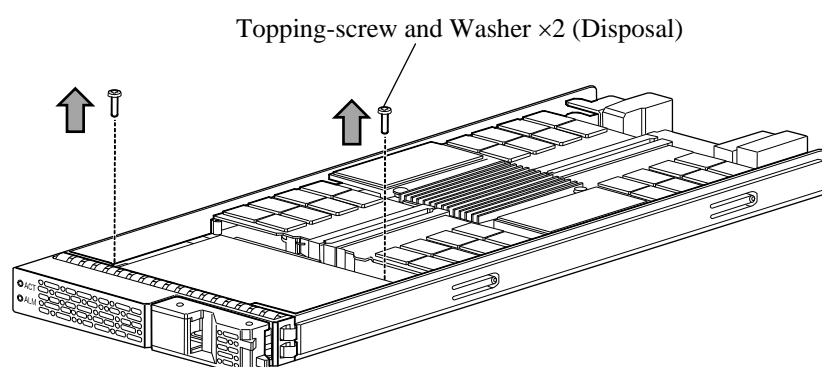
Removing Tapping-screws and Washers
